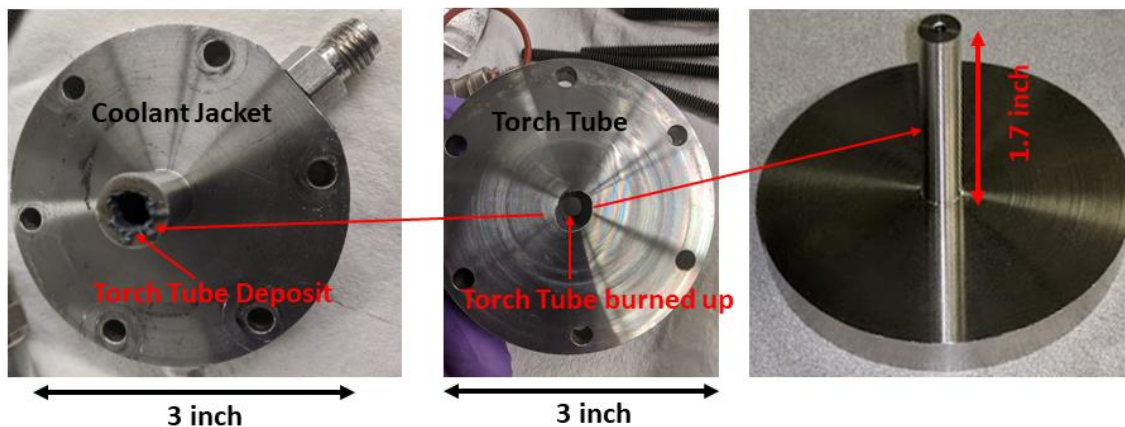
Post-test inspection showing hardware damage of the coolant jacket [Left] and torch tube [Center, Right].
